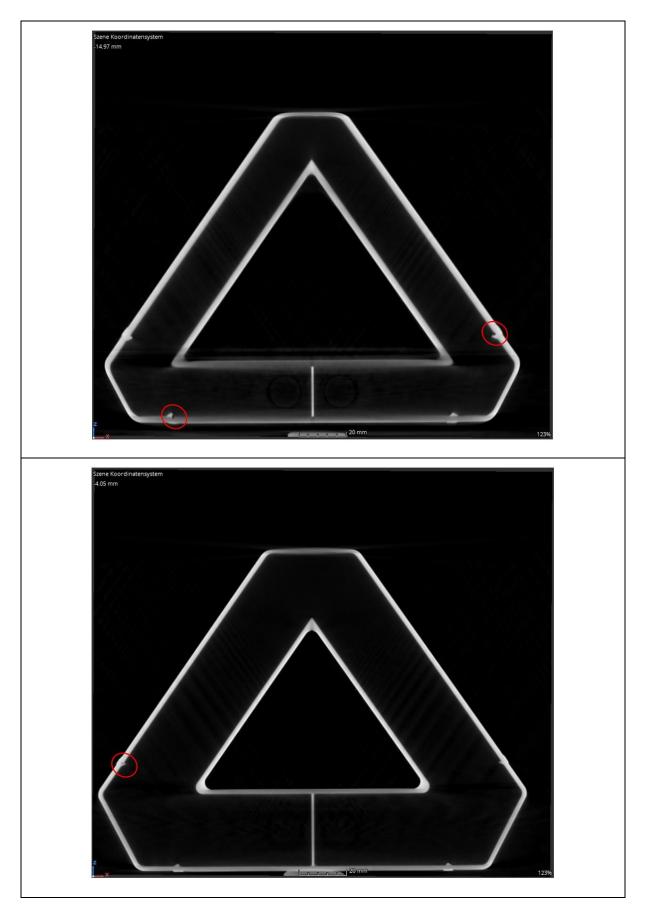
Top view of weld No.1 and No.2 picture 3-4
